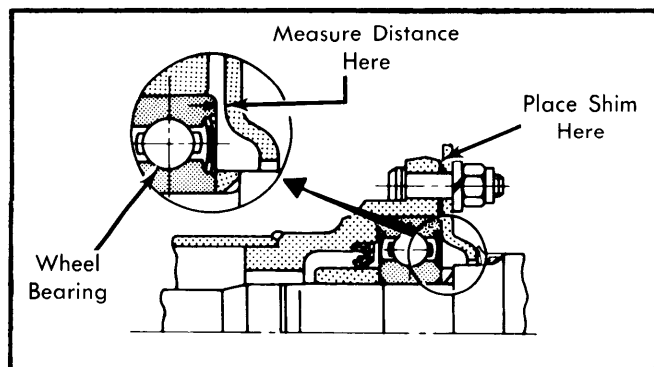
Location for Checking Clearance Between Wheel Bearing and Axle Tube End on All Models Except Pickup
